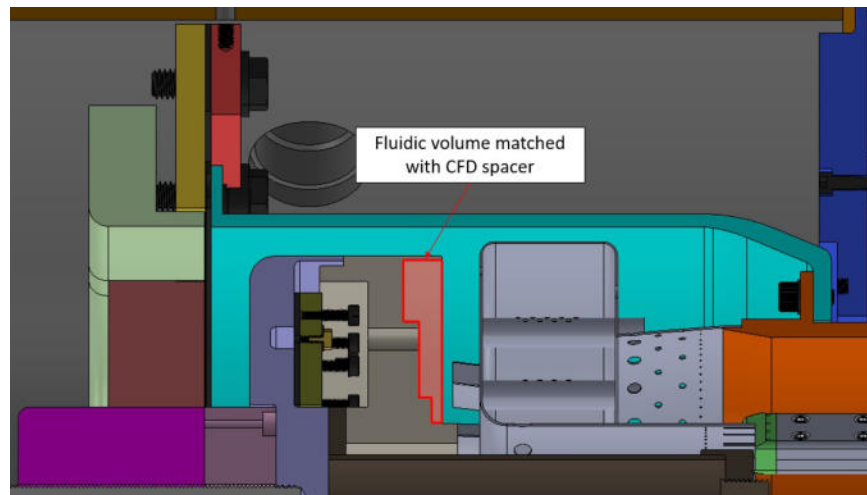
The outboard cavity-stabilized compact combustor assembled with the fuel manifold assembly, CFD domain spacer, and shaft housing
